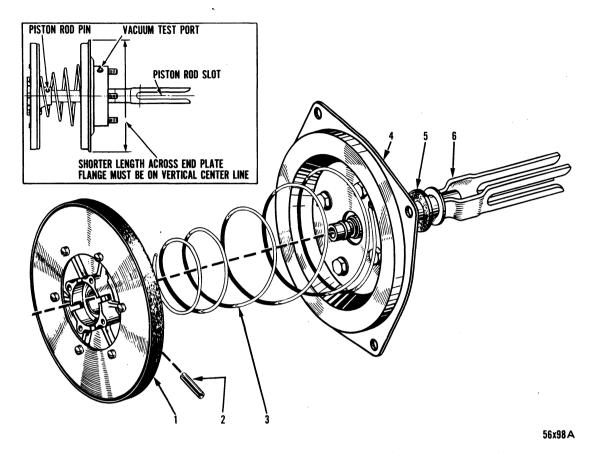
Assembly of Piston, Piston Retainer Springs, and Piston Rod to End Plate
